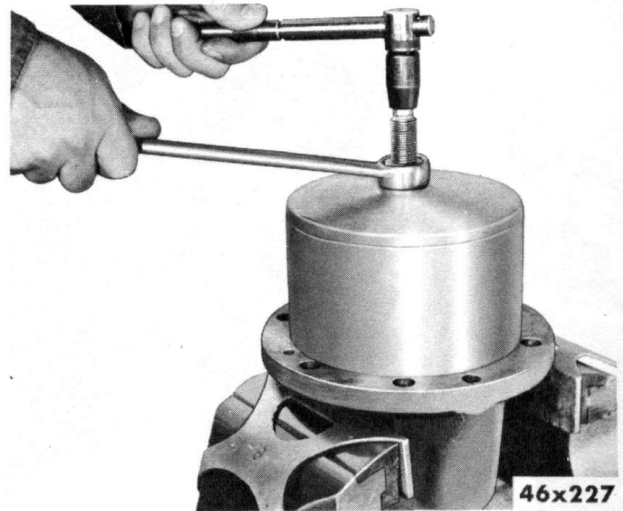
Removing Pinion Bearing Cups from Cage, Tool DD-966
